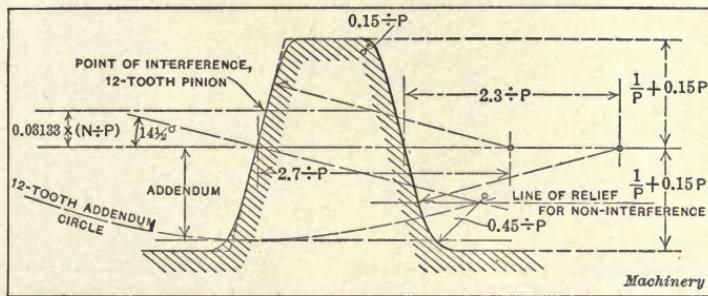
Hob Tooth designed to generate the Approximate Shape of a 14½-degree Involute Milled Tooth
